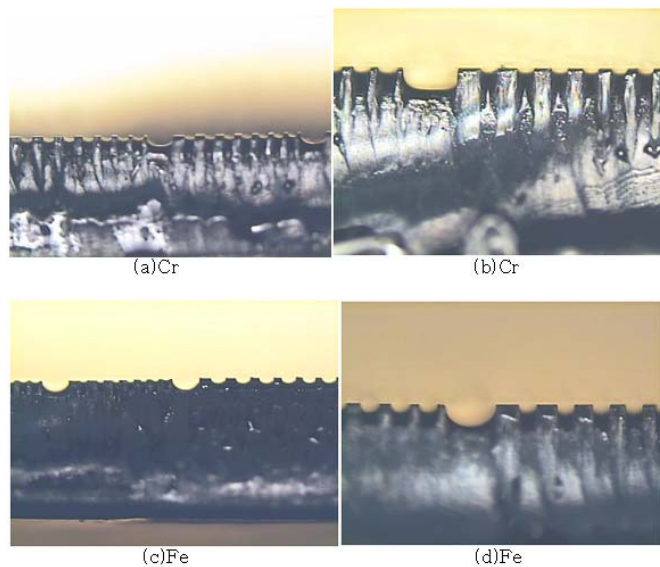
Ink filling results for molded channel plate coated with Fe & Cr(Cross-section)
